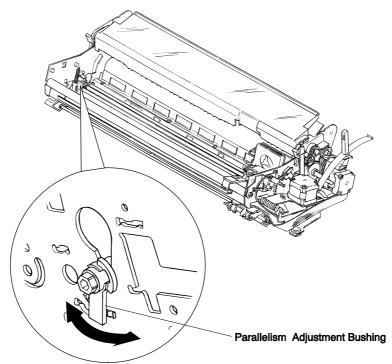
Adjusting the Parallelism of the CR Guide Shaft
